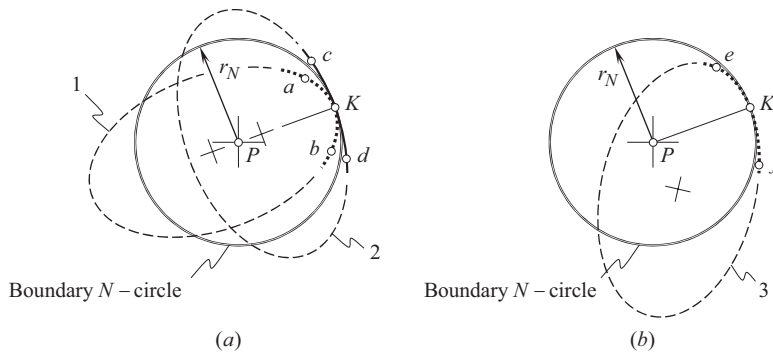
Examples of possible tooth flank geometries in *Novikov/conformal* gear pair: possible shapes of the tooth flank of (a) a pinion  $\mathcal{P}$  and of (b) the mating gear  $\mathcal{G}$ .
